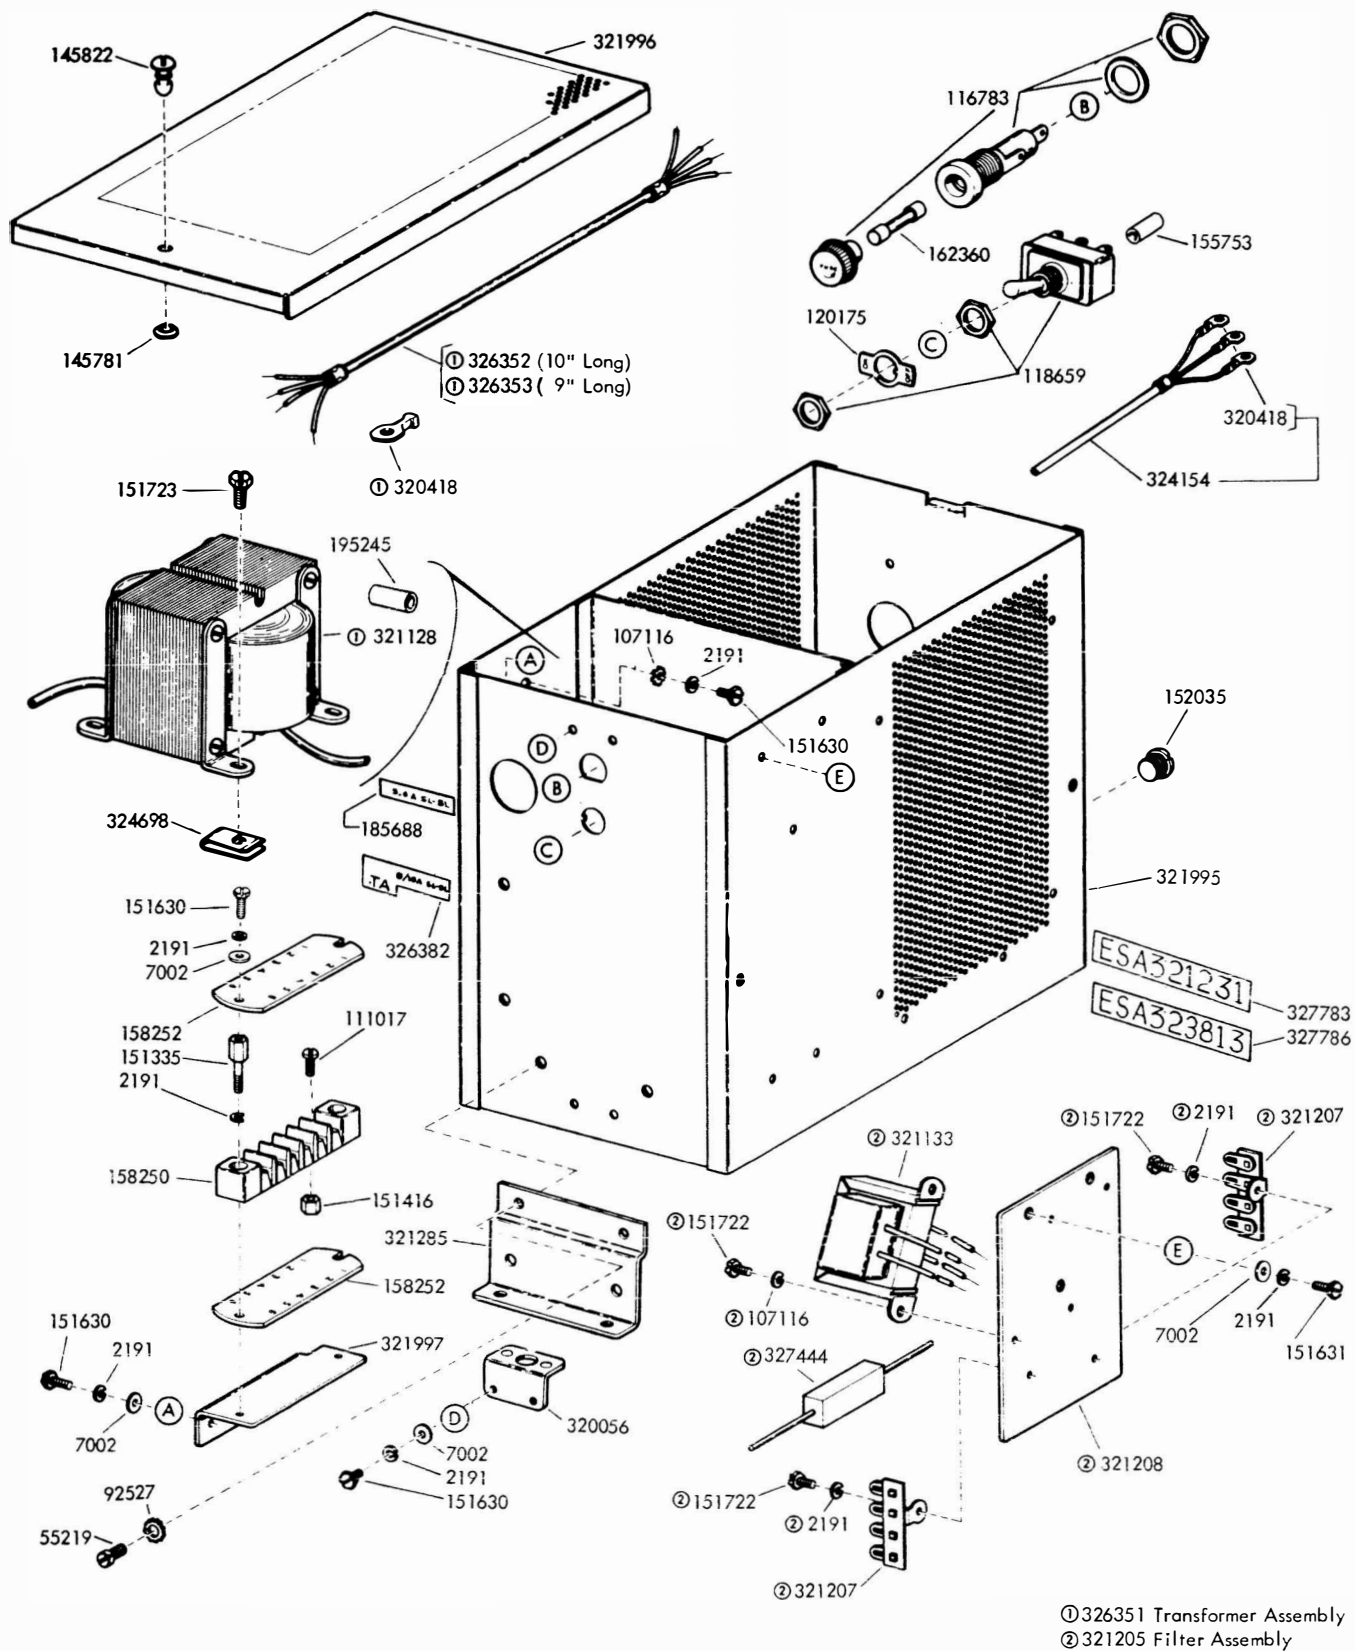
321231 ELECTRICAL SERVICE ASSEMBLY - Used w/ROTR, KSR and RO Sets and 323813 ELECTRICAL SERVICE ASSEMBLY - Used w/ROTR Set
